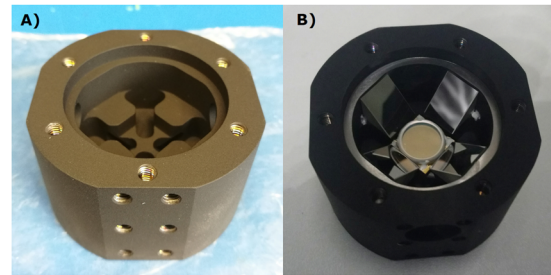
(a) The prism MOT chamber post coating. (b) The chamber post machining and assembly of optical components.
